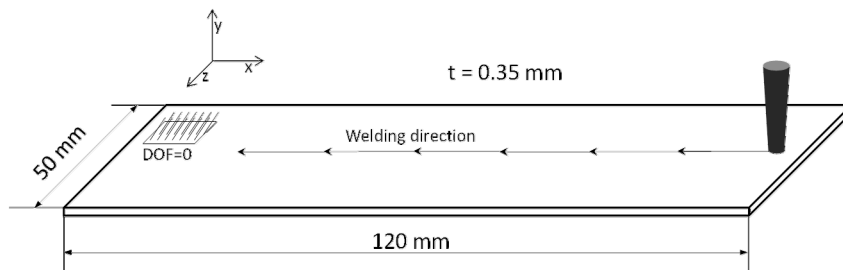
Schematic representation of the single sheet welding experiment, using a statically determined mechanical constraint; one area of support with fully locked degrees of Freedom (DOF)
